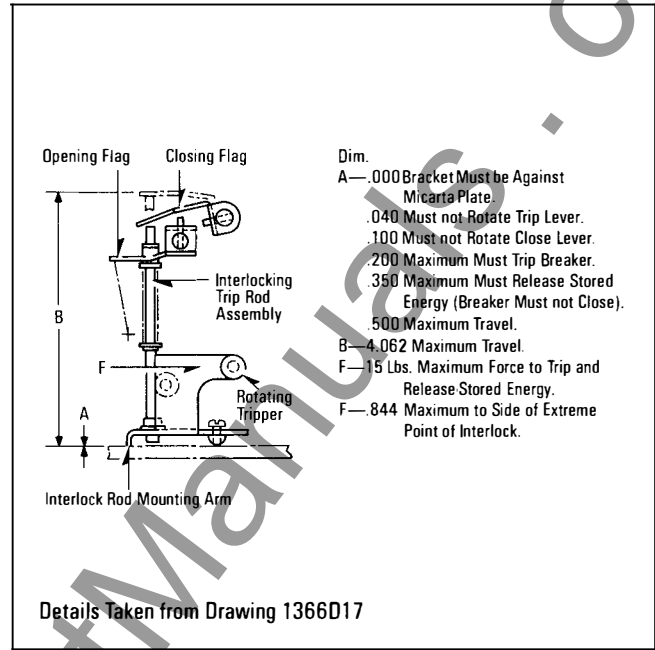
Interlock Trip Rod Adjustment Dimensions.
